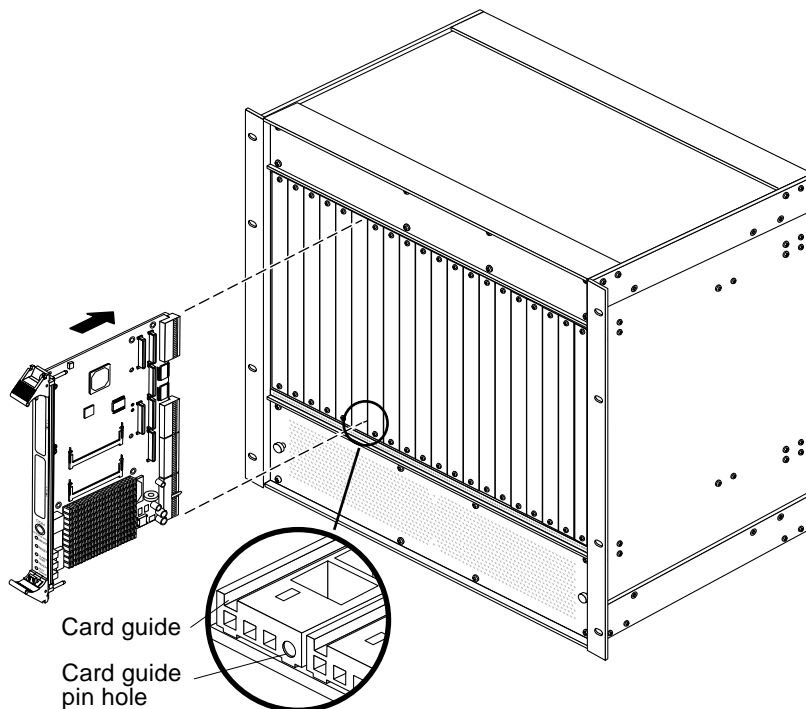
Installing a Netra CP2300 Board Into a cPSB Chassis Slot
